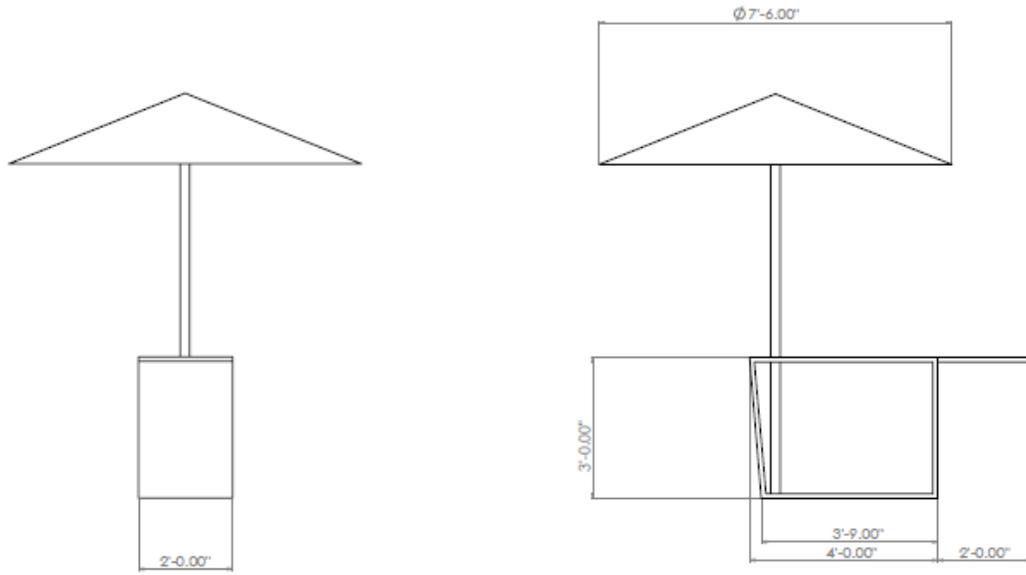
Dimensioned Drawing of the proposed cart. Dimensions in feet and inches
